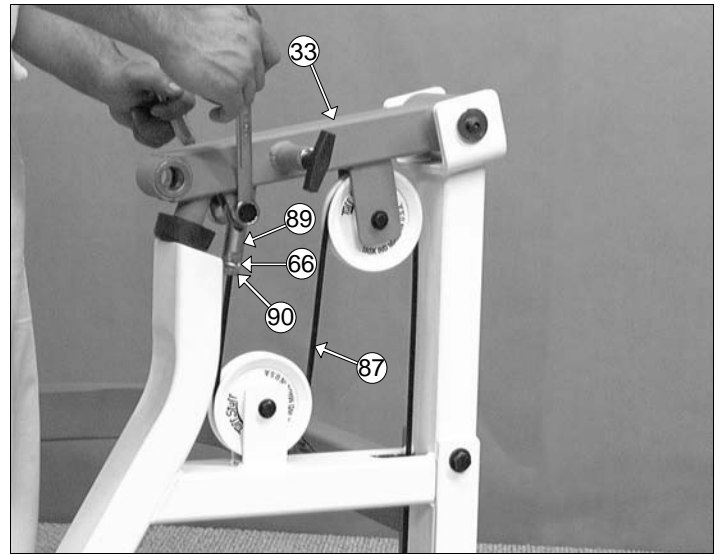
Insert a Split Lock Washer Z/P 1/2" (#66) to the Cable Hex Bolt 1/2-20 X 1 (#90) then thread the Rod End 1/2-20 (#89) to the Cable Hex Bolt 1/2-20 X 1 (#90). Next, affix the Rod End 1/2-20 (#89) to the Press Bar Pivot Arm (#33) using one Hex Head Cap Screw 1/2-13 X 1 1/2 (#81), and one Nylon Insert Jam Lock Nut 1/2-13 (#85).
